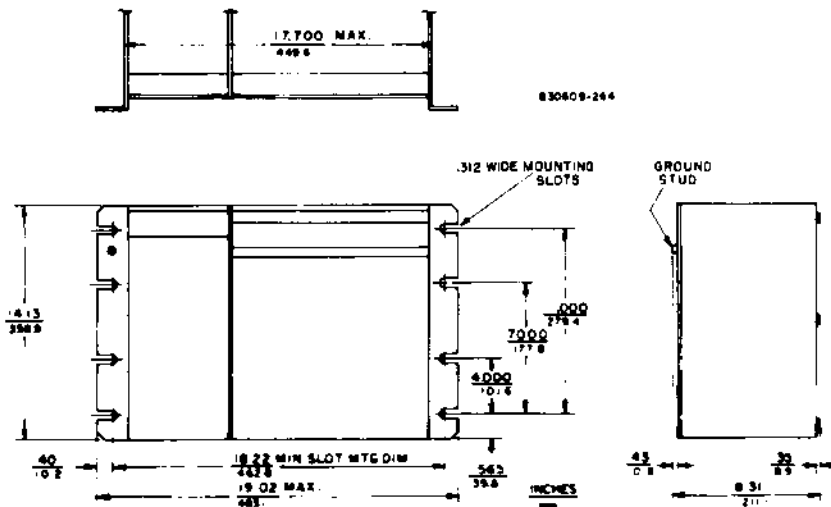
8030 HRK-150 Rack Assembly Rack Mounting Dimensions
